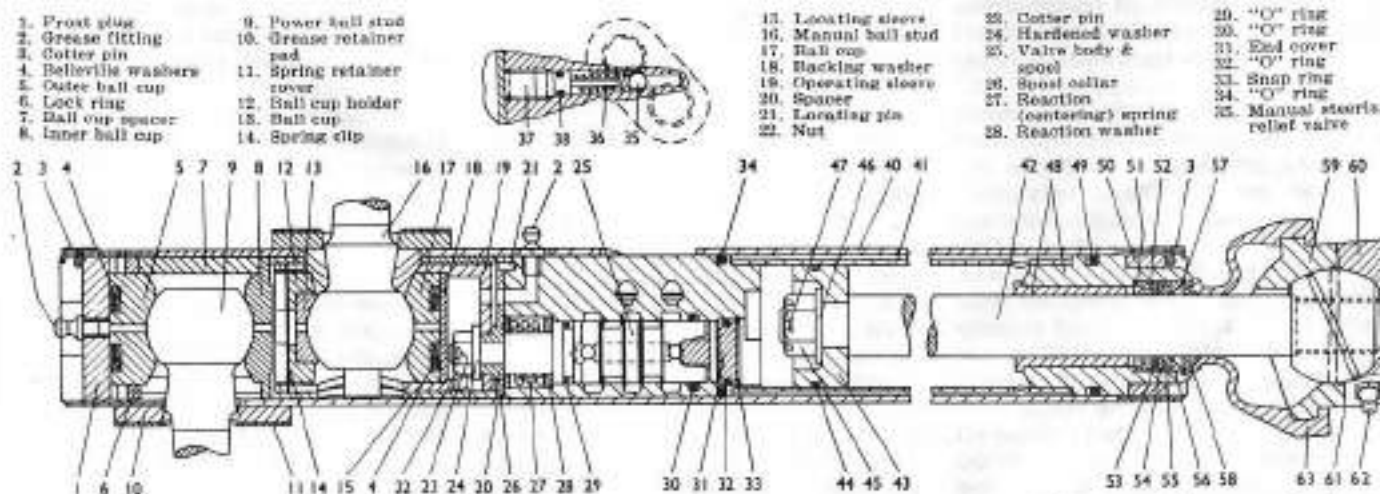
Cross-sectional view of non-reactive type power steering cylinder typical of that used on all tractors with power steering except early models 880 and 990. Cross-sectional view of manual steering relief valve is shown above the cylinder. The relief valve allows oil to circulate within the cylinder when steering tractor with engine not running or if pump is inoperative. Refer to Fig. 26 for exploded view of unit.
